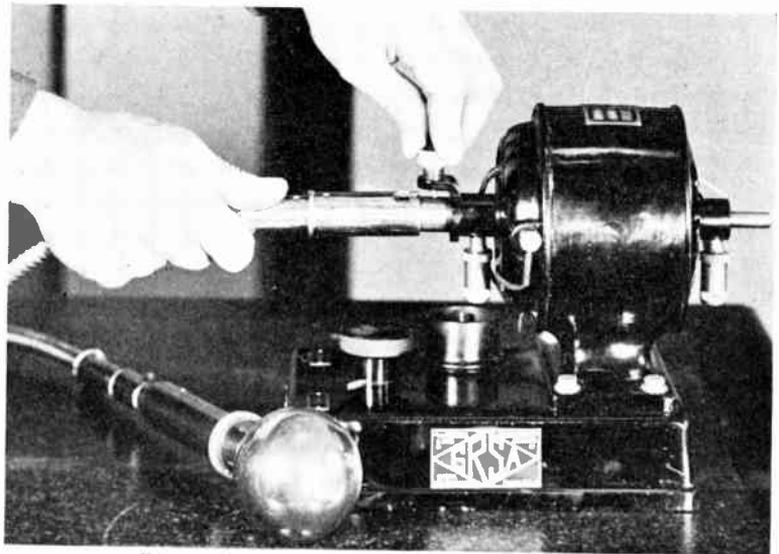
ATTACHING FLEXIBLE SHAFT TO MOTOR.
